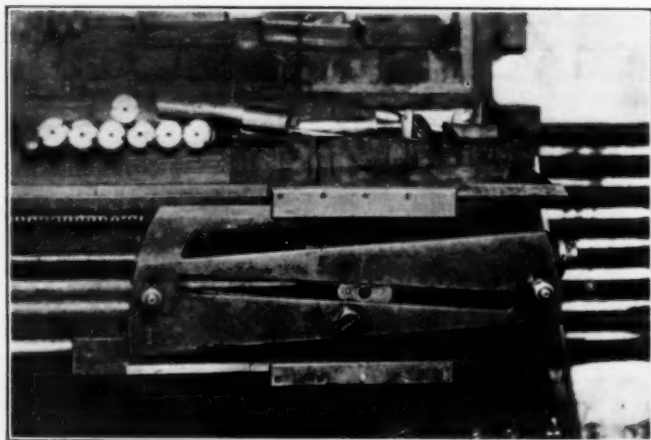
LEAD-ADJUSTING ATTACHMENT FOR LATHE
